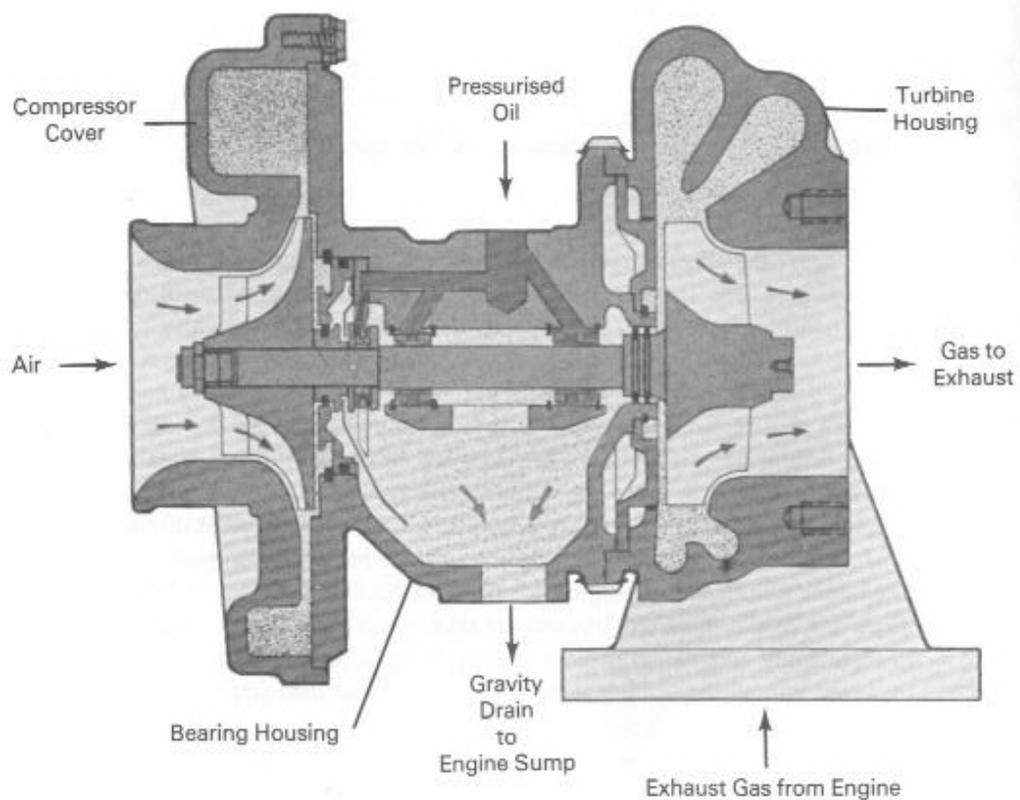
Cross-section of a diesel-engine turbocharger. (Courtesy of Holset Engineering Co., Inc.)
